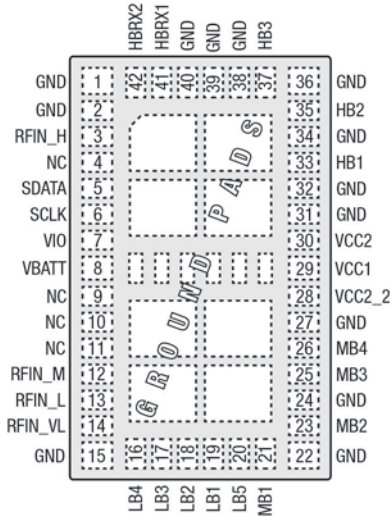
PCB Layout Footprint for 4.0 mm x 6.8 mm, 42-Pad Package – SKY77638-11
